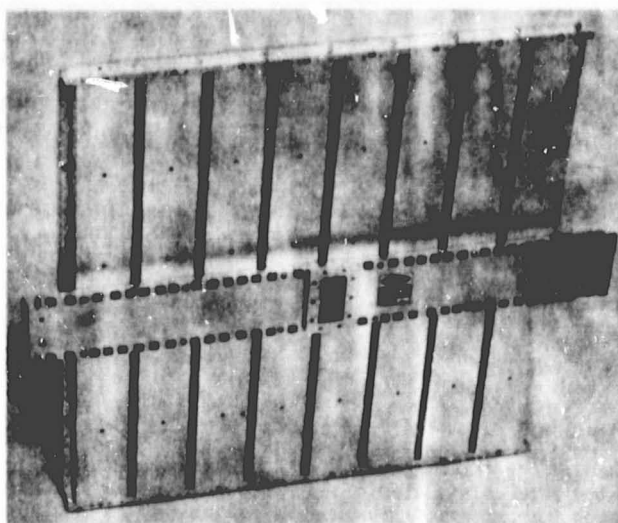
Back View of the 8 x 8 Slotted Waveguide Array as Constructed from 0.020 Inch Aluminum Sheet Throughout and Assembled by Means of Spot Welding.
